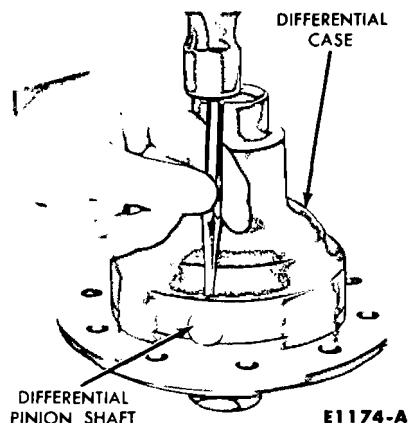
Removing Differential Pinion Shaft Lock Pin
